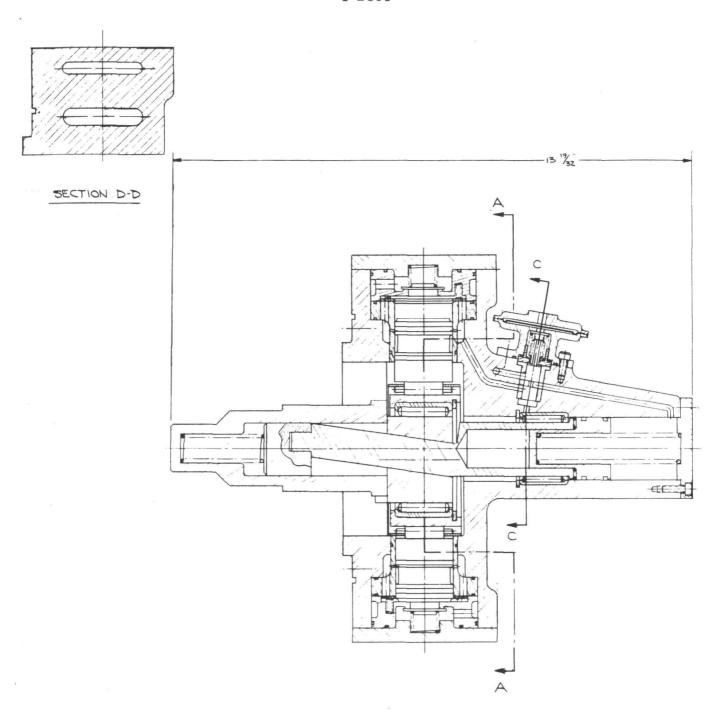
Reciprocating Piston Pump with Variable Displacement - Cross Section.
